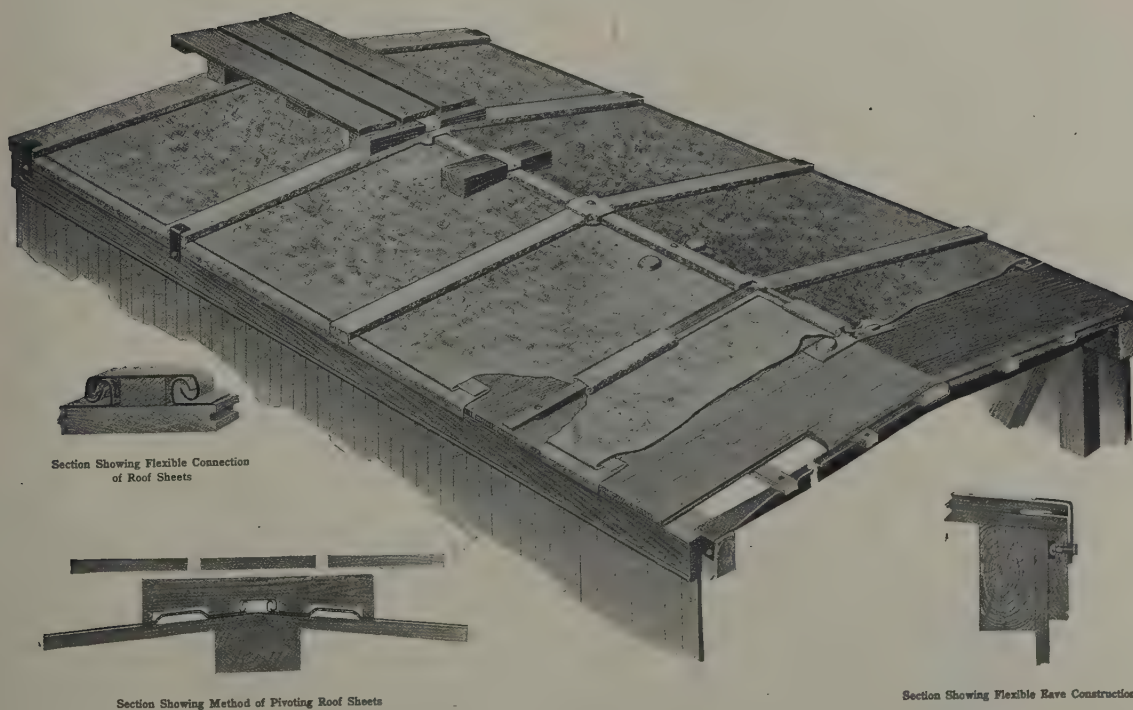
XLA Flexible Roof. The Standard Railway Equipment Company.
